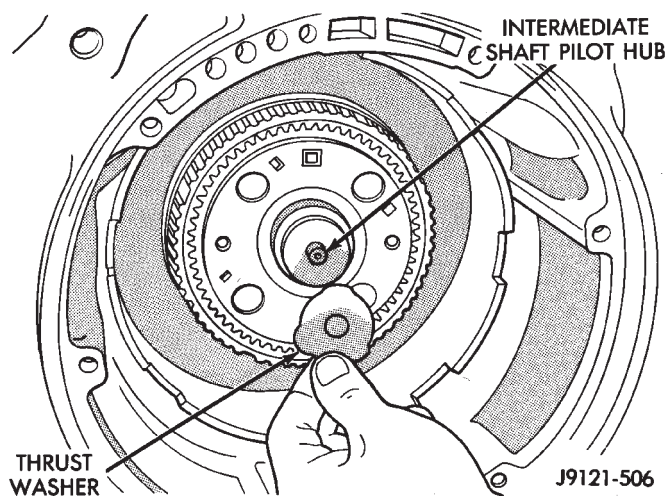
Removing Intermediate Shaft Thrust Washer (46RH)
